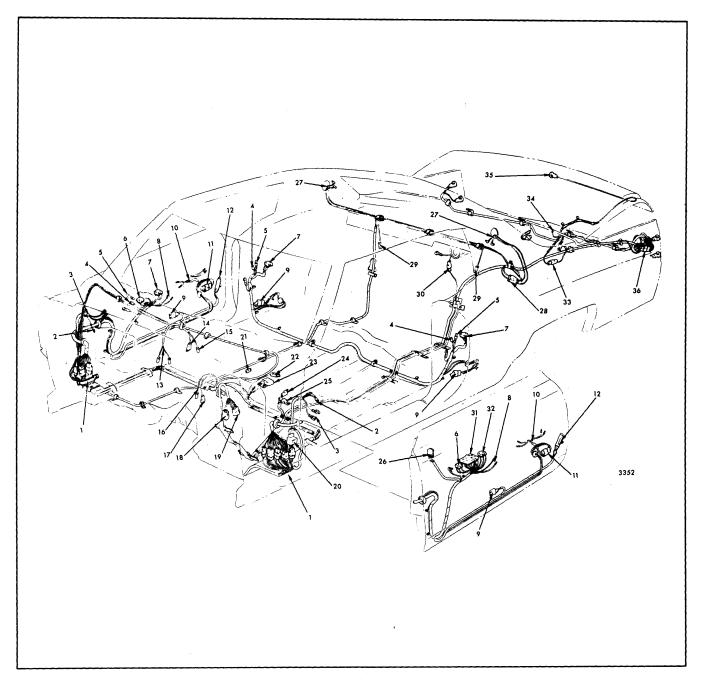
Cadillac "C-47" Style Body Wire Routing (Typical)
